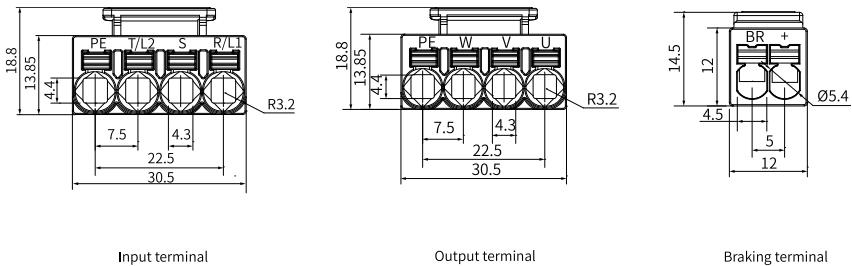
Main circuit terminal dimensions (mm) of T2 models
